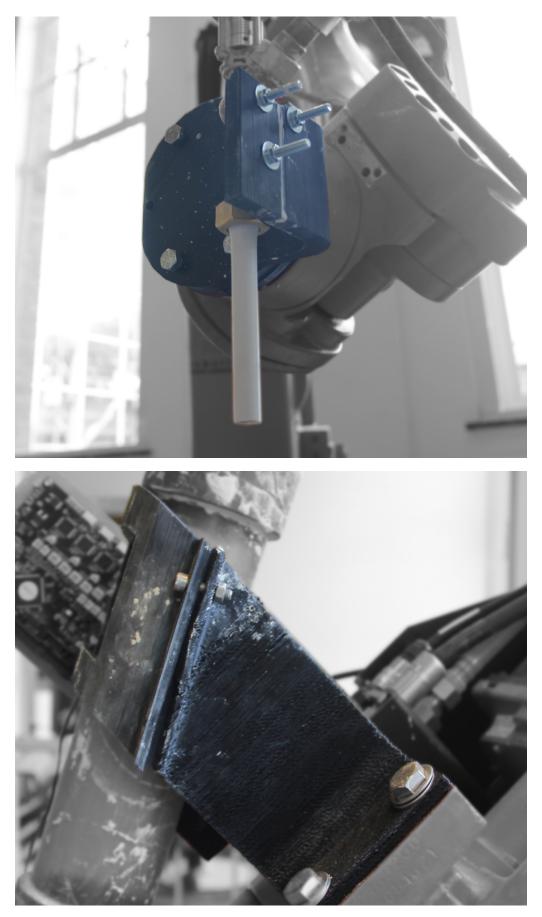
Top: 3d printed Extruder mounting on the wrist, Bottom: Cartridge adjustable mounting accepts two sizes of cartridges. (Source: Author)
